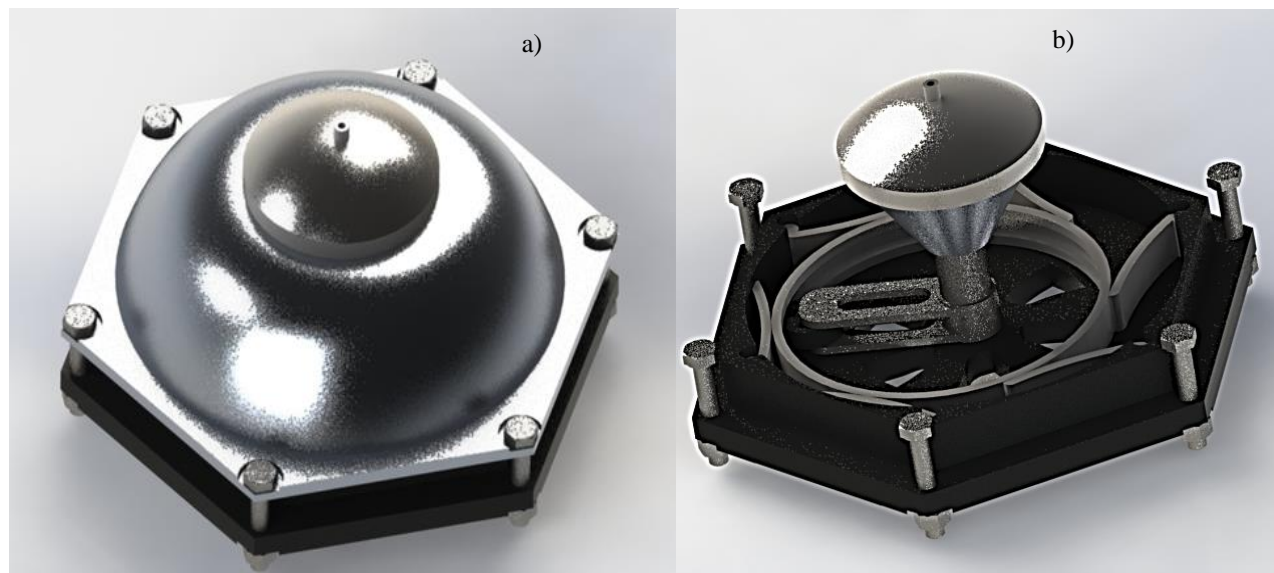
Assembly views with material on SolidWorks a) Full assembly; b) Top opened assembly
